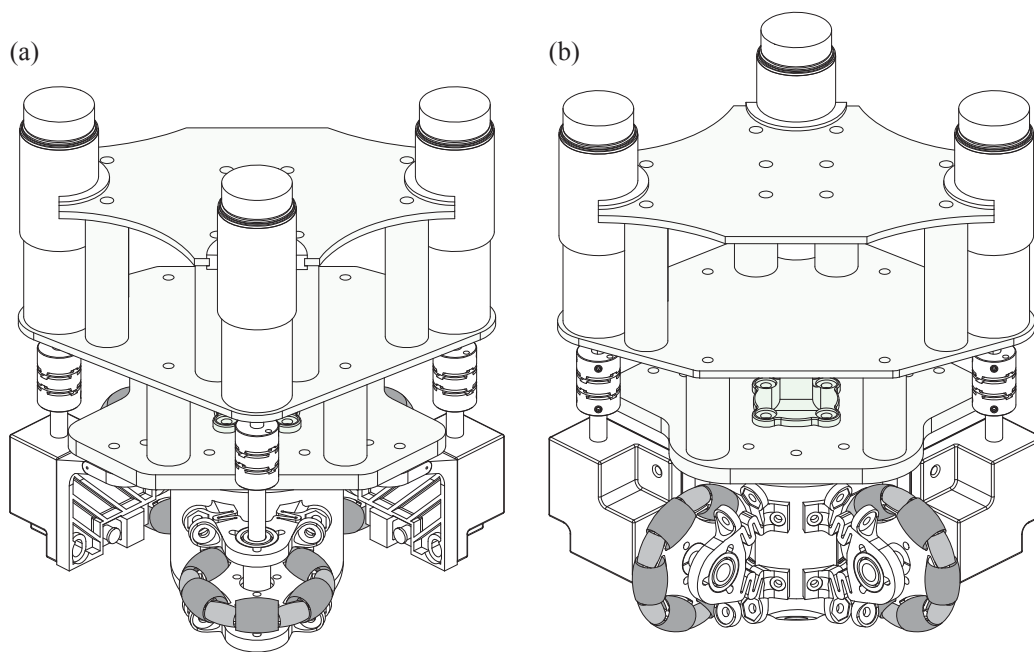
Rendering of the SAMM with necessary mounting hardware, complete with gearmotor mounts and mounting platform.
